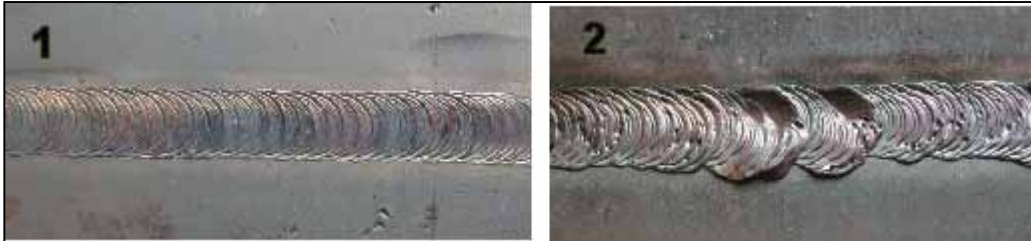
The welding trials with the pulsed welding current. The numbers in Figure refer to Table 6.
